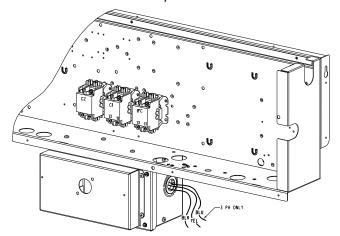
Location of Non-Fused Disconnect Enclosure
